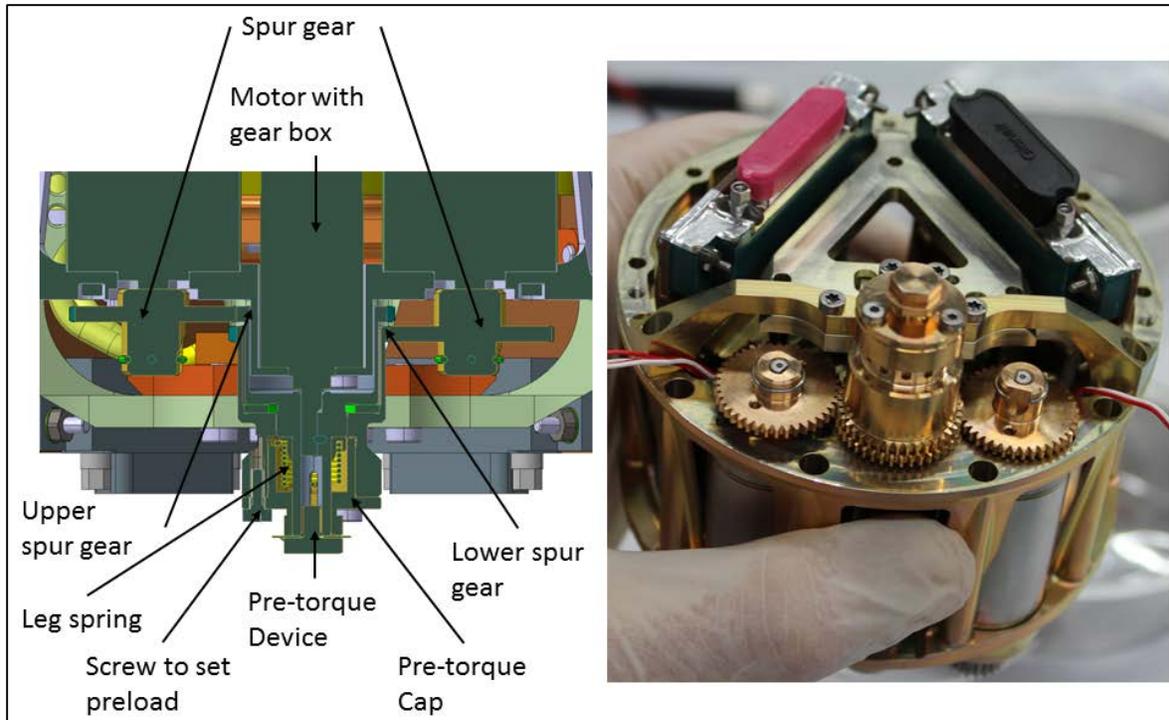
Pre-torque Device CAD model (left) and hardware (right).
